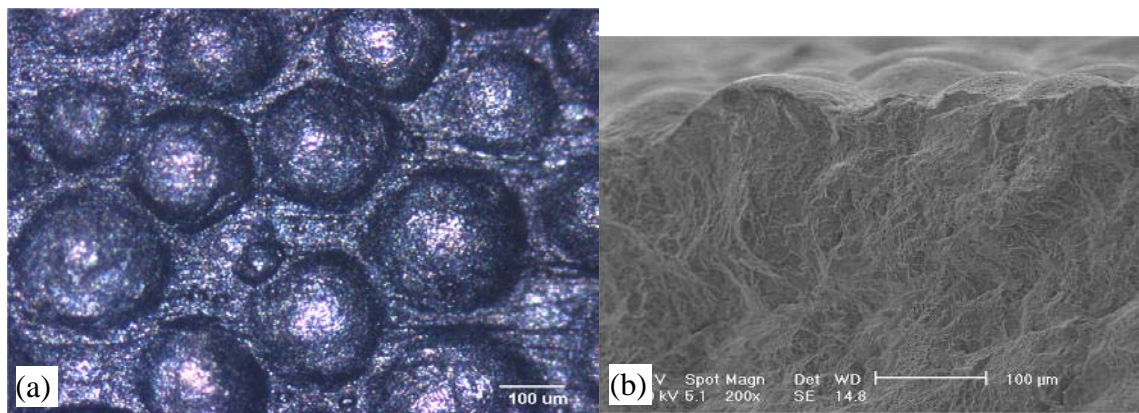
Showing (a) as-HIPped surface morphology of a net shaped tensile sample produced using mild steel tooling and (b) tensile fracture surface of HIPped Ti64 with as- HIPped surface
